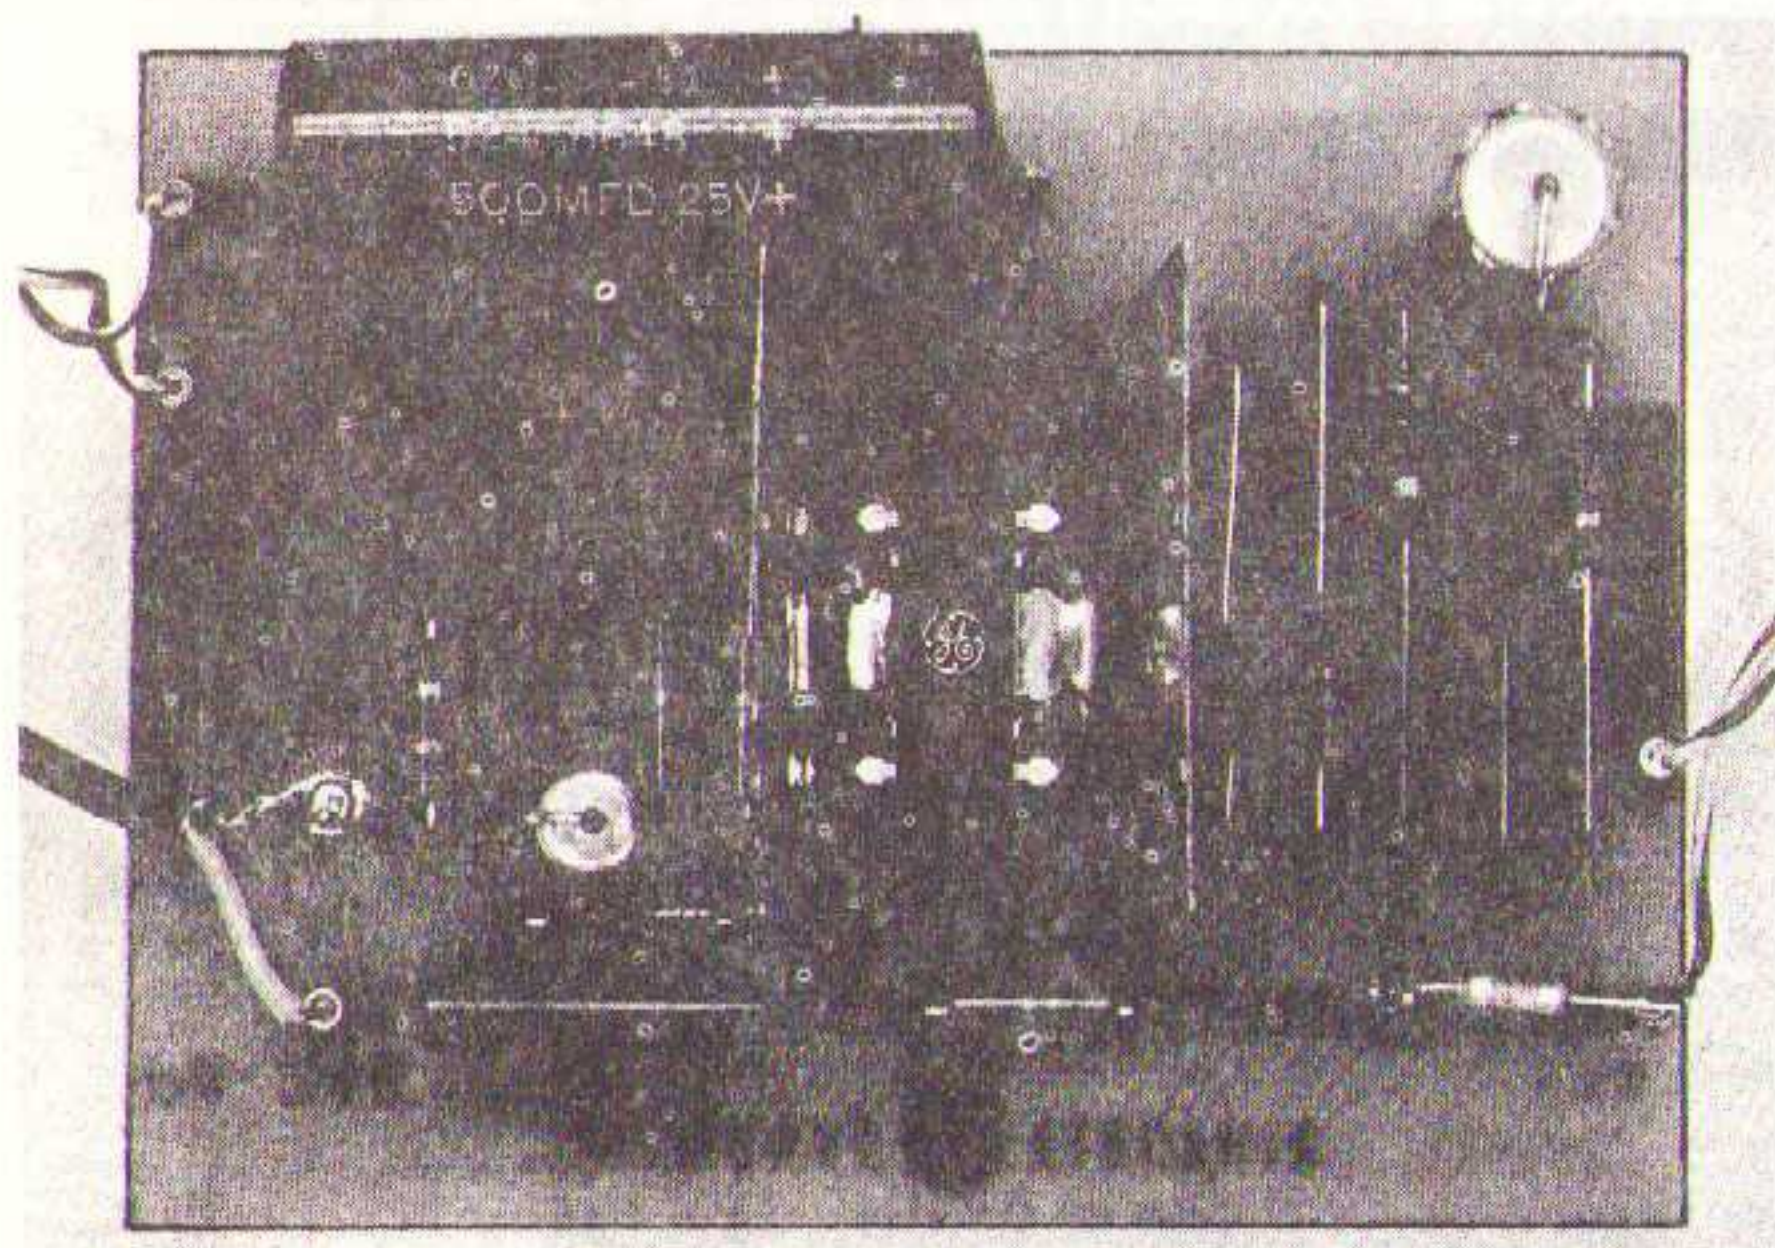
Completed Circuit Assembly of Amplifier Shown in Figure 2
